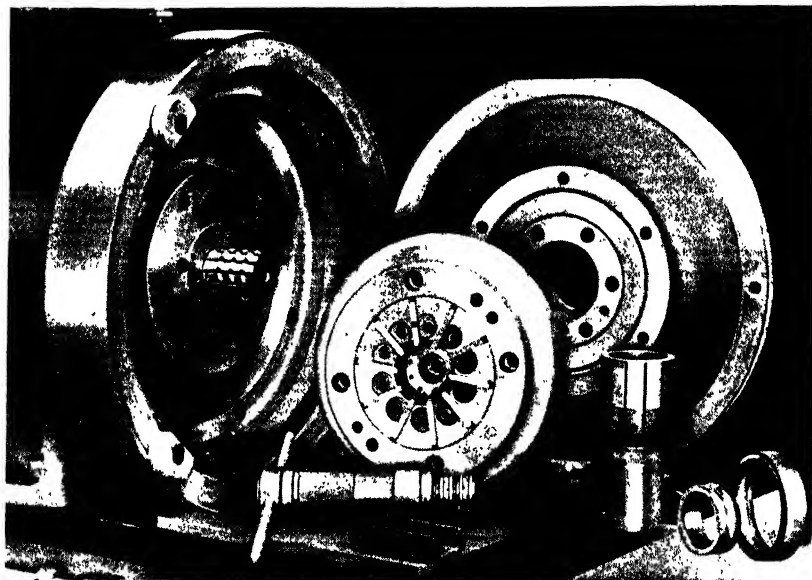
Tooling Equipment for Planamilling Ball-bearing Races
